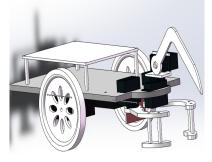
Assembly drawing of the three-dimensional entity of the handling trolley
